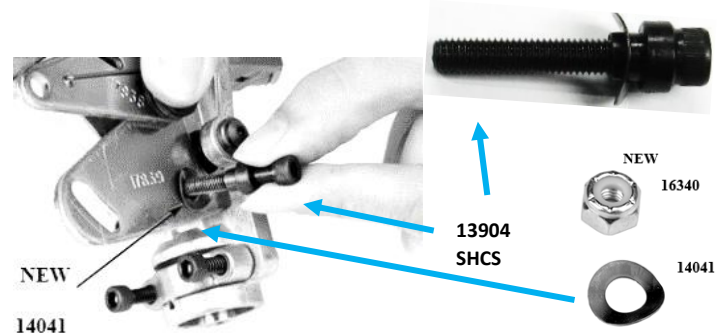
Remove the old Kep Nut 13817, the old Flat Washer 17870, Bushing 13848 and SHCS 13904 using a 3/8" End Wrench and a 5/32" Allen Wrench
